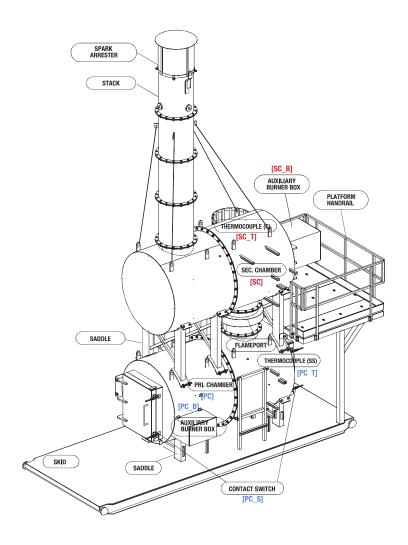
COMPONENTS IN THE PRIMARY AND SECONDARY CHAMBER SECTIONS (2)
